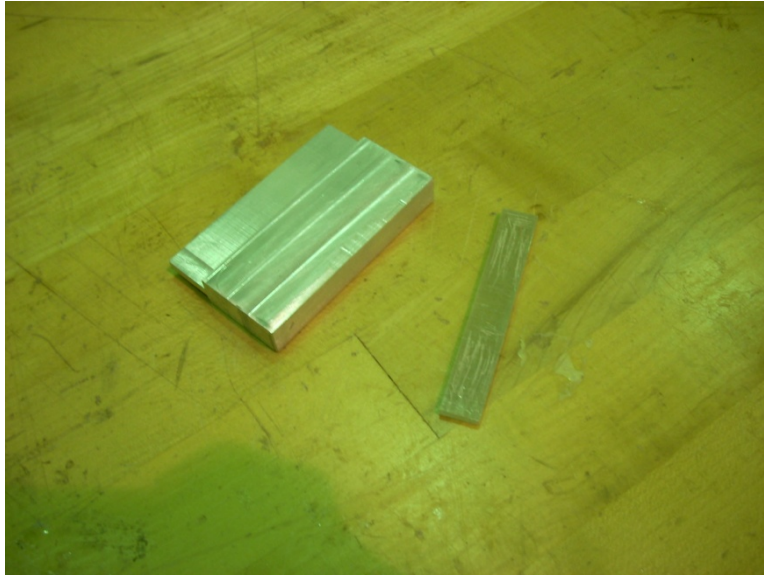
Aluminum Template and Compressive Specimen in Accordance with ASTM D695M
